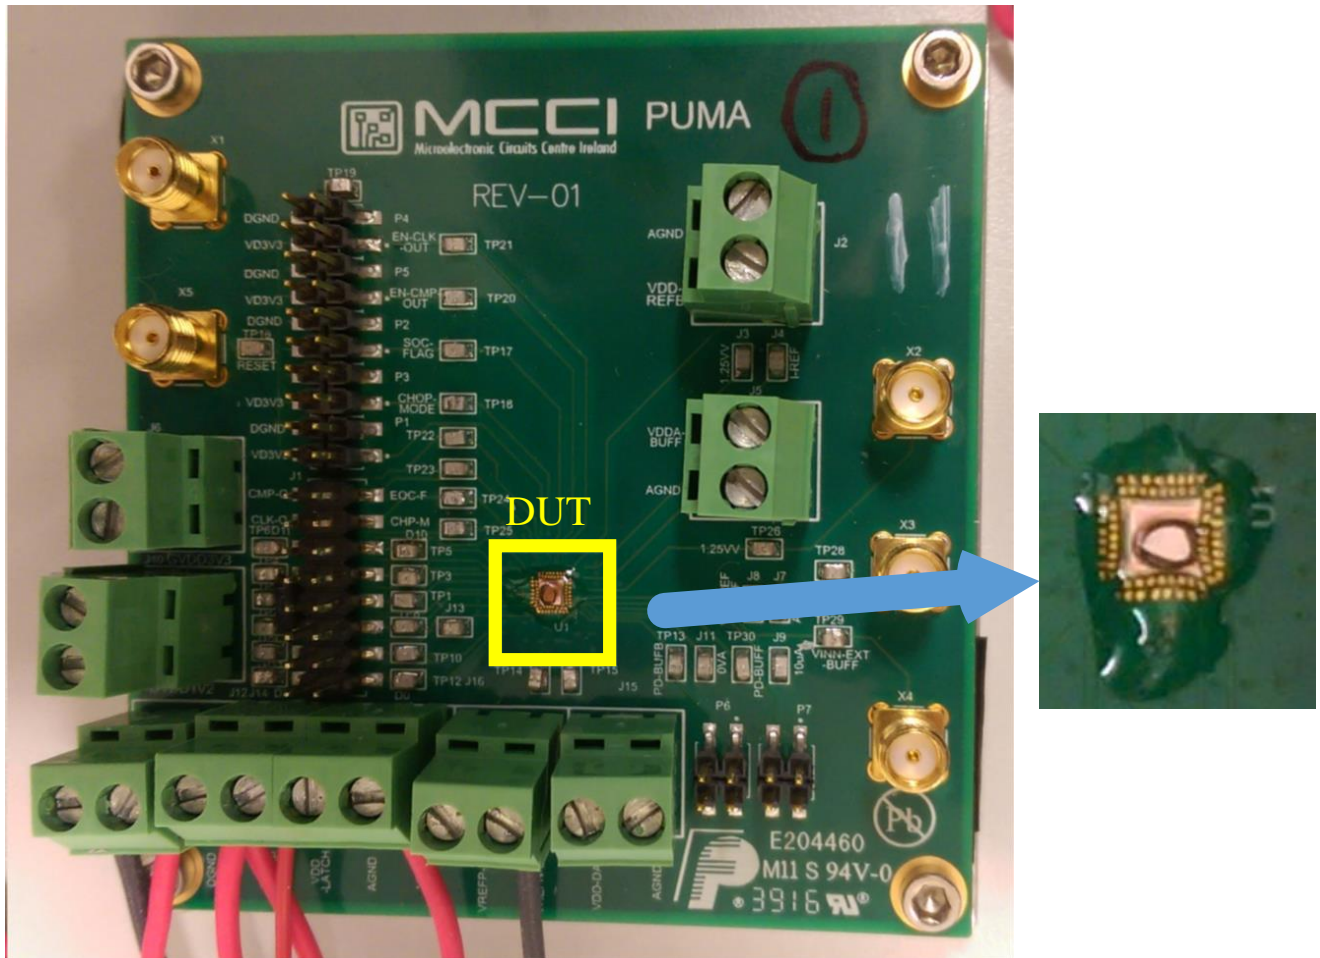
Photograph of the test-PCB with a close up of DUT
